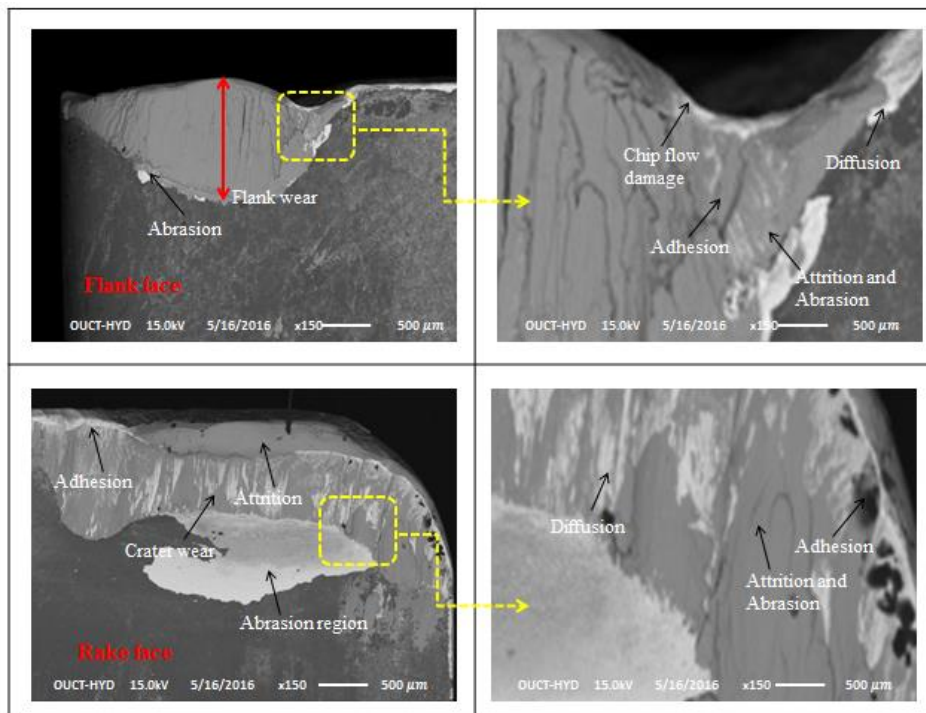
SEM images of cutting tool in wet machining condition at cutting speed 100 m/min
